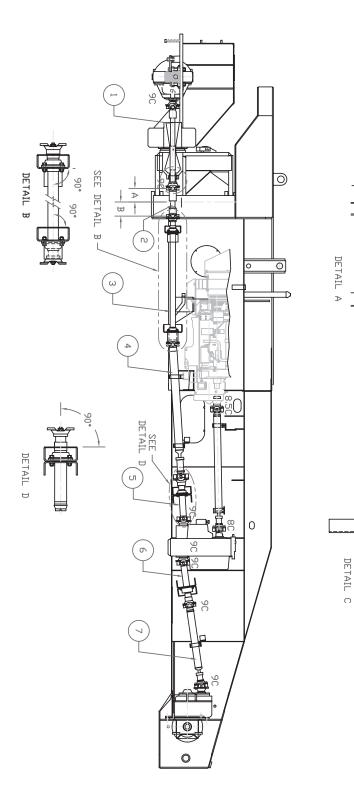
Using a magnetic angle detector to check driveline support is perpendicular to the center line of the driveline.
